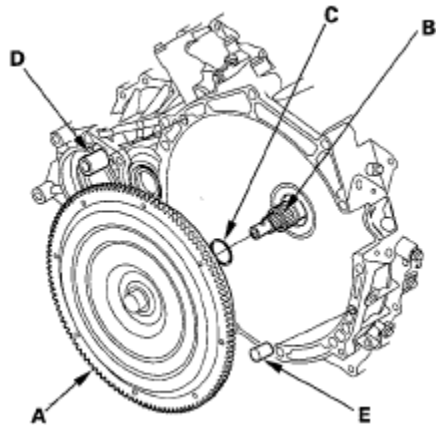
Identifying Torque Converter, Mainshaft And Dowel Pin
